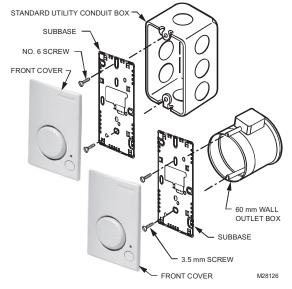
Mounting on Standard Utility Conduit Box or 60 mm Wall Outlet Box (TR23 Shown).
